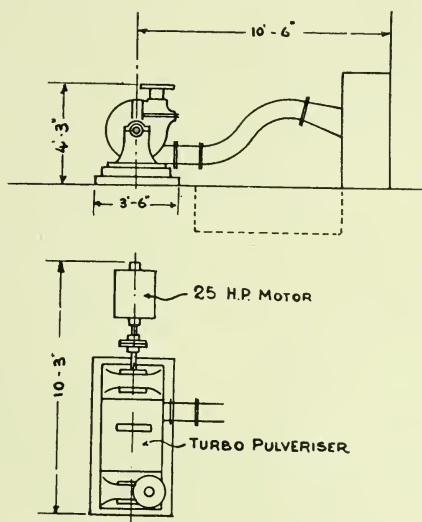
ARRANGEMENT OF PULVERISER AND BURNER FOR FIRING A SINGLE UNIT FURNACE OR BOILER.
